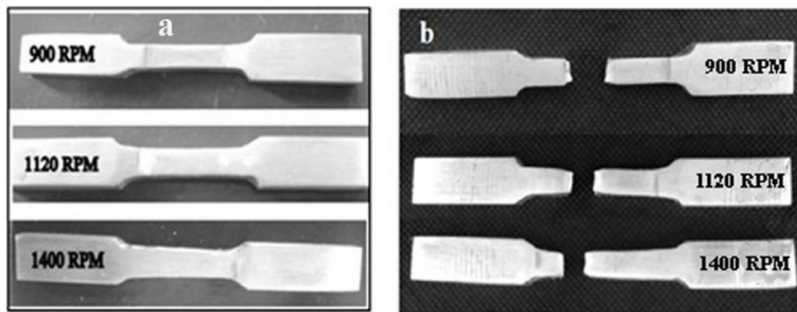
Tensile samples RR-DSFSW (a) Before testing; (b) After testing.
